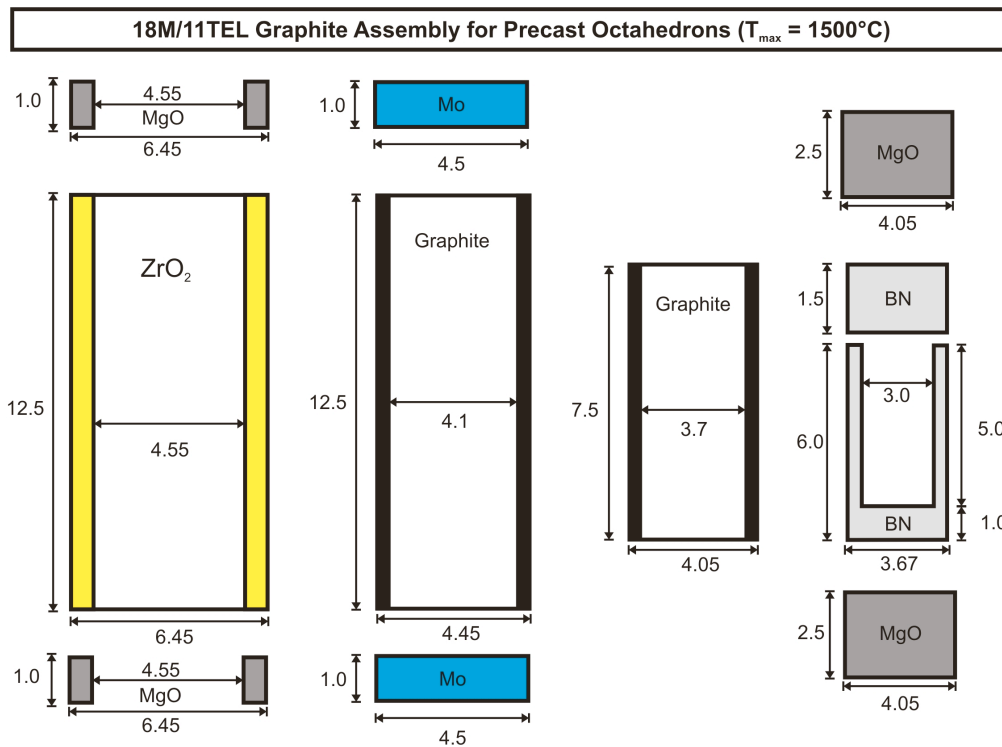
Dimensions/mm of the pieces used for an 18/11 assembly (precast MgO-octahedron, pyrophyllite gaskets).
